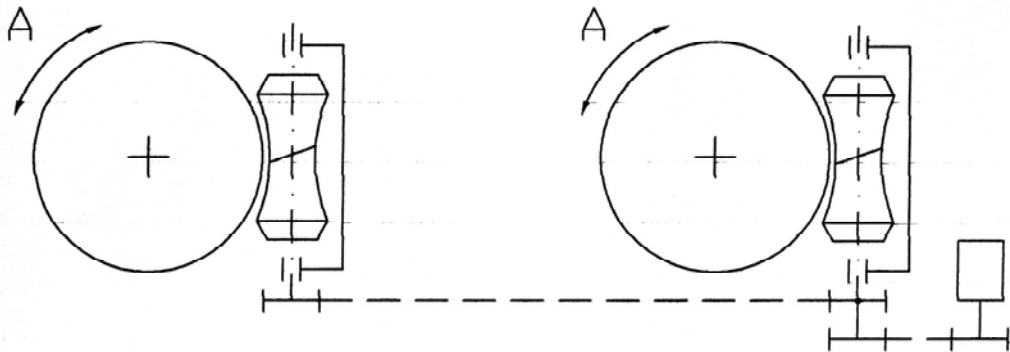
Tilting axis A by double CONDRIVE gear mechanism
